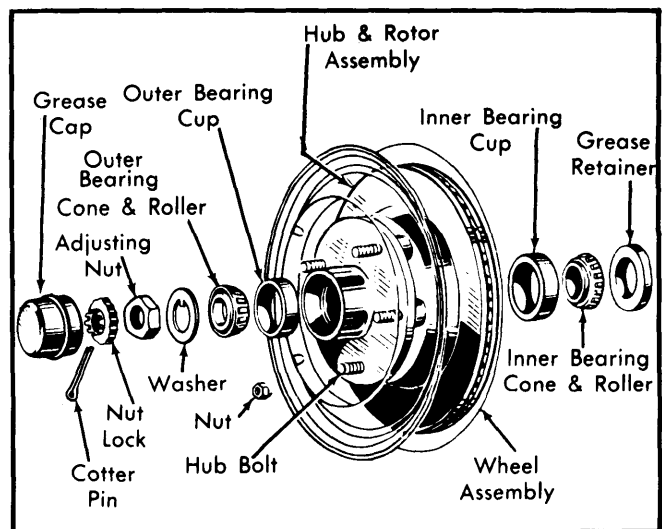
Exploded View of Wheel Bearing Components with Disc Brakes
